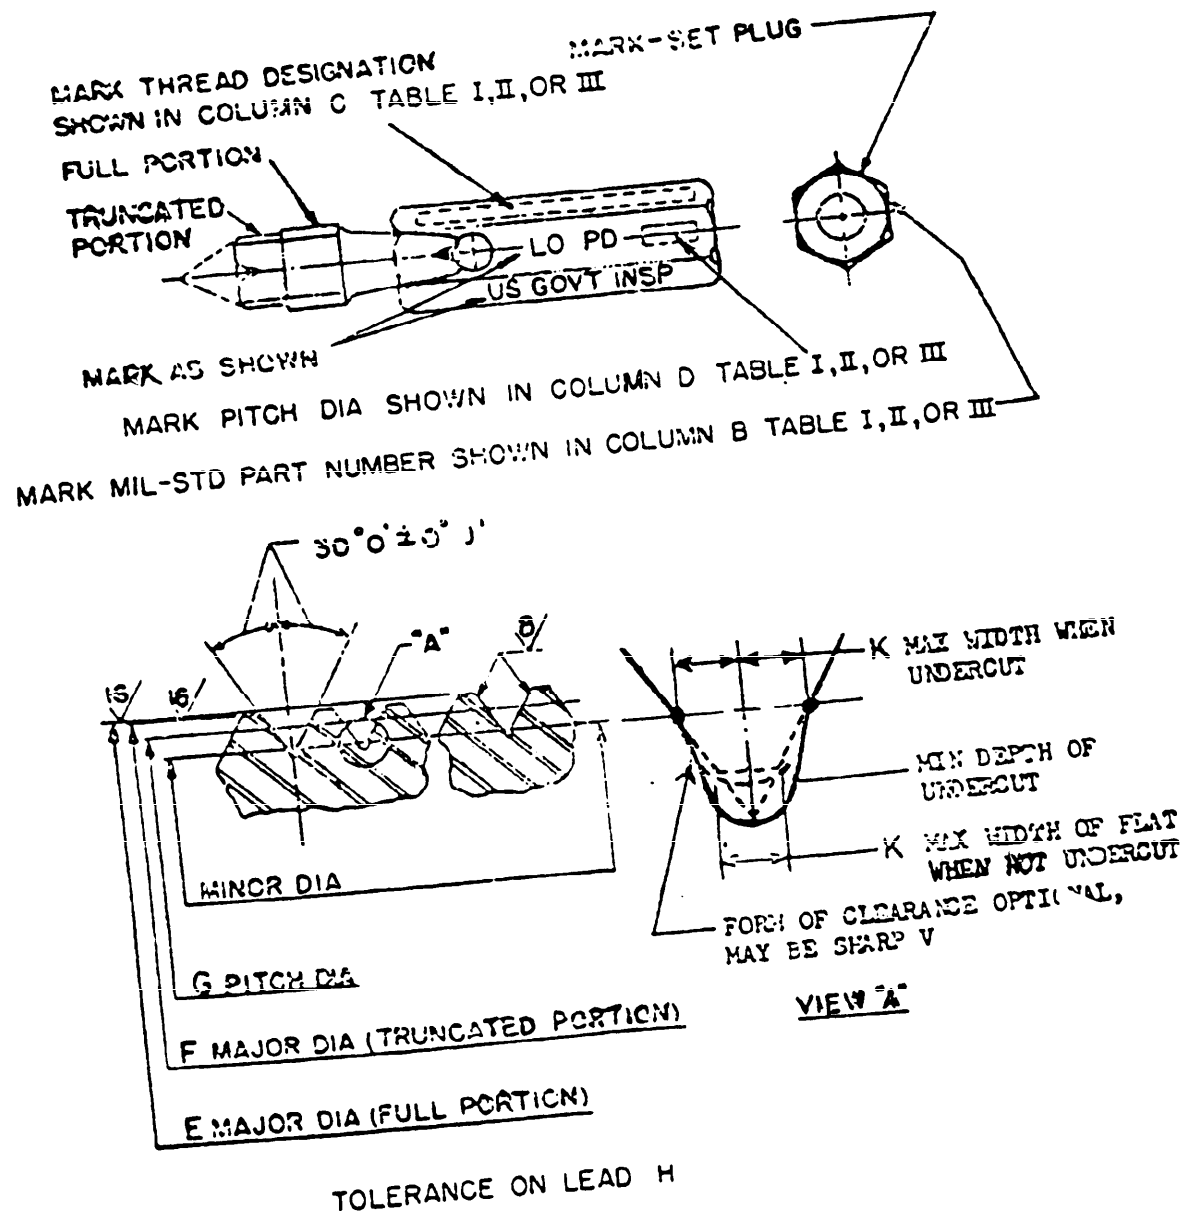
Truncated thread setting plug gage (taperlock type).
